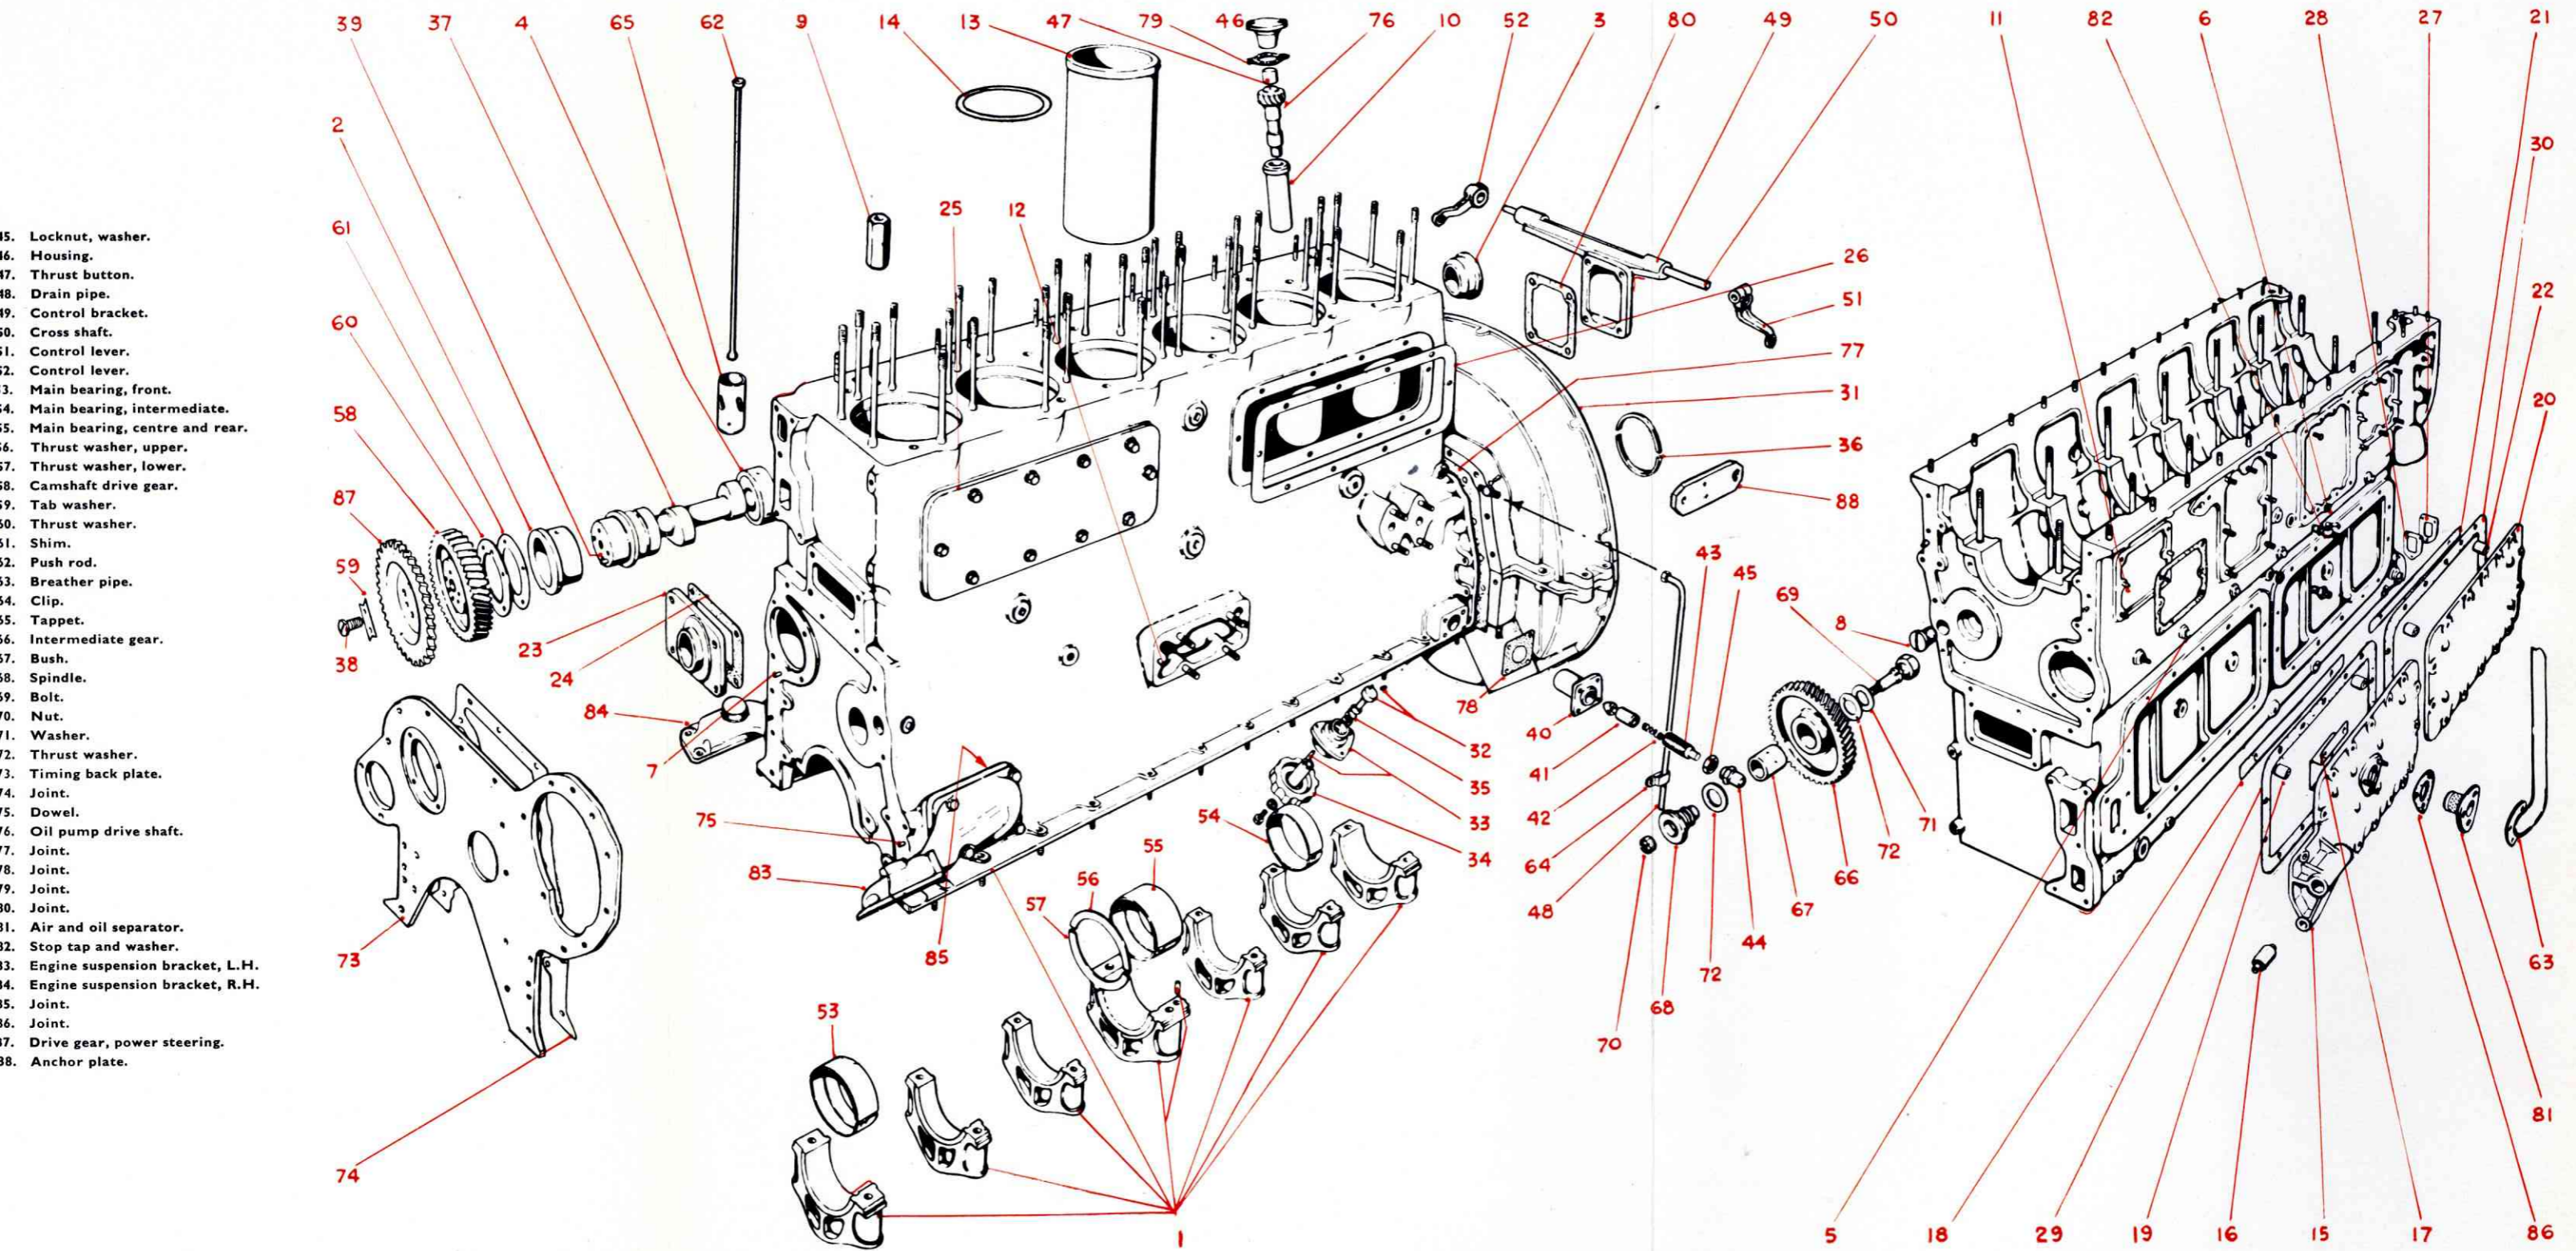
TYPICAL ILLUSTRATION OF ENGINE BLOCK COMPONENTS
